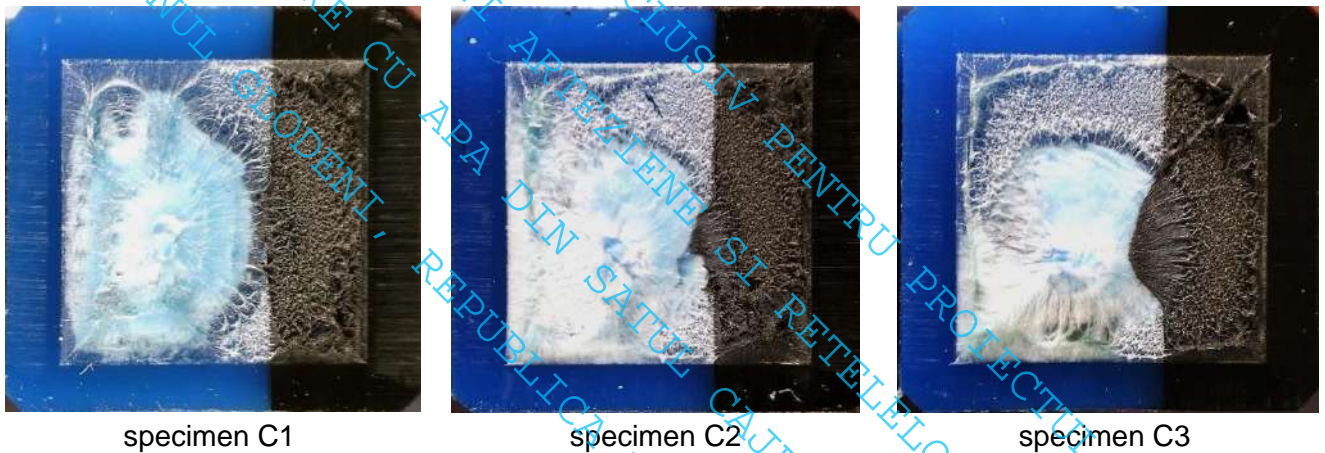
Top view of the fracture surfaces (one half of each specimen)
